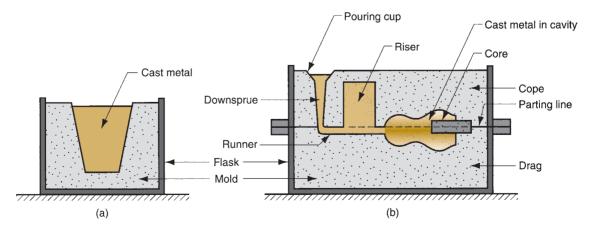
Two forms of mold: (a) open mold, simply a container in the shape of the desired part; and (b) closed mold, in which the mold geometry is more complex and requires a gating system (passageway) leading into the cavity.
